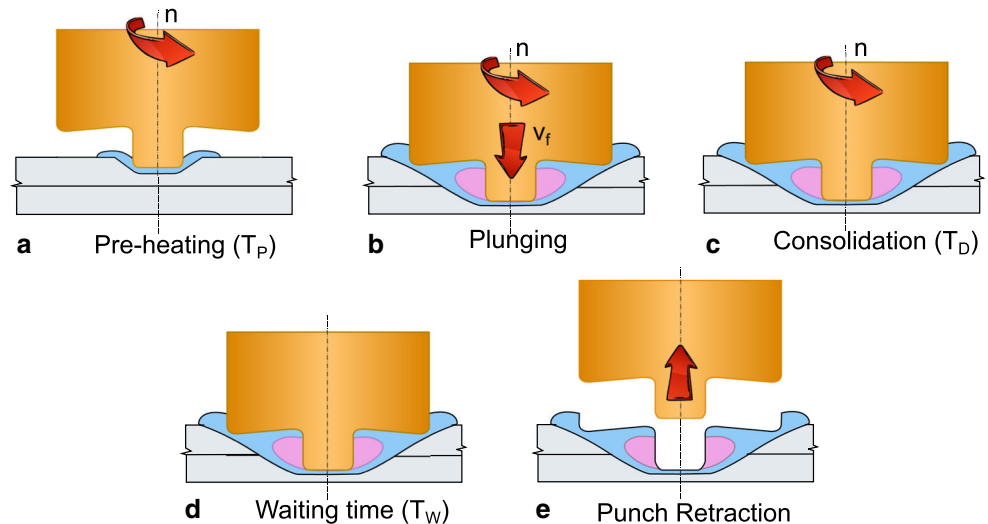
Typical phases of friction stir spot welding process: pre-heating, joining, consolidation and tool retraction
